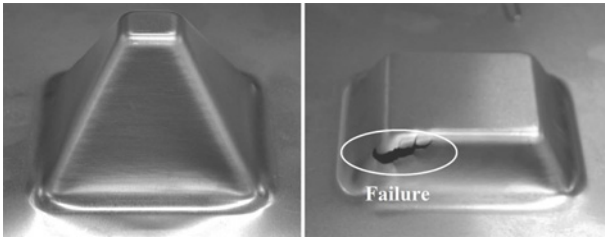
Deformed shapes of flat specimen for the cone angles $\theta = 60^\circ$ (safe formed, left) and 62° (failure occurred)
